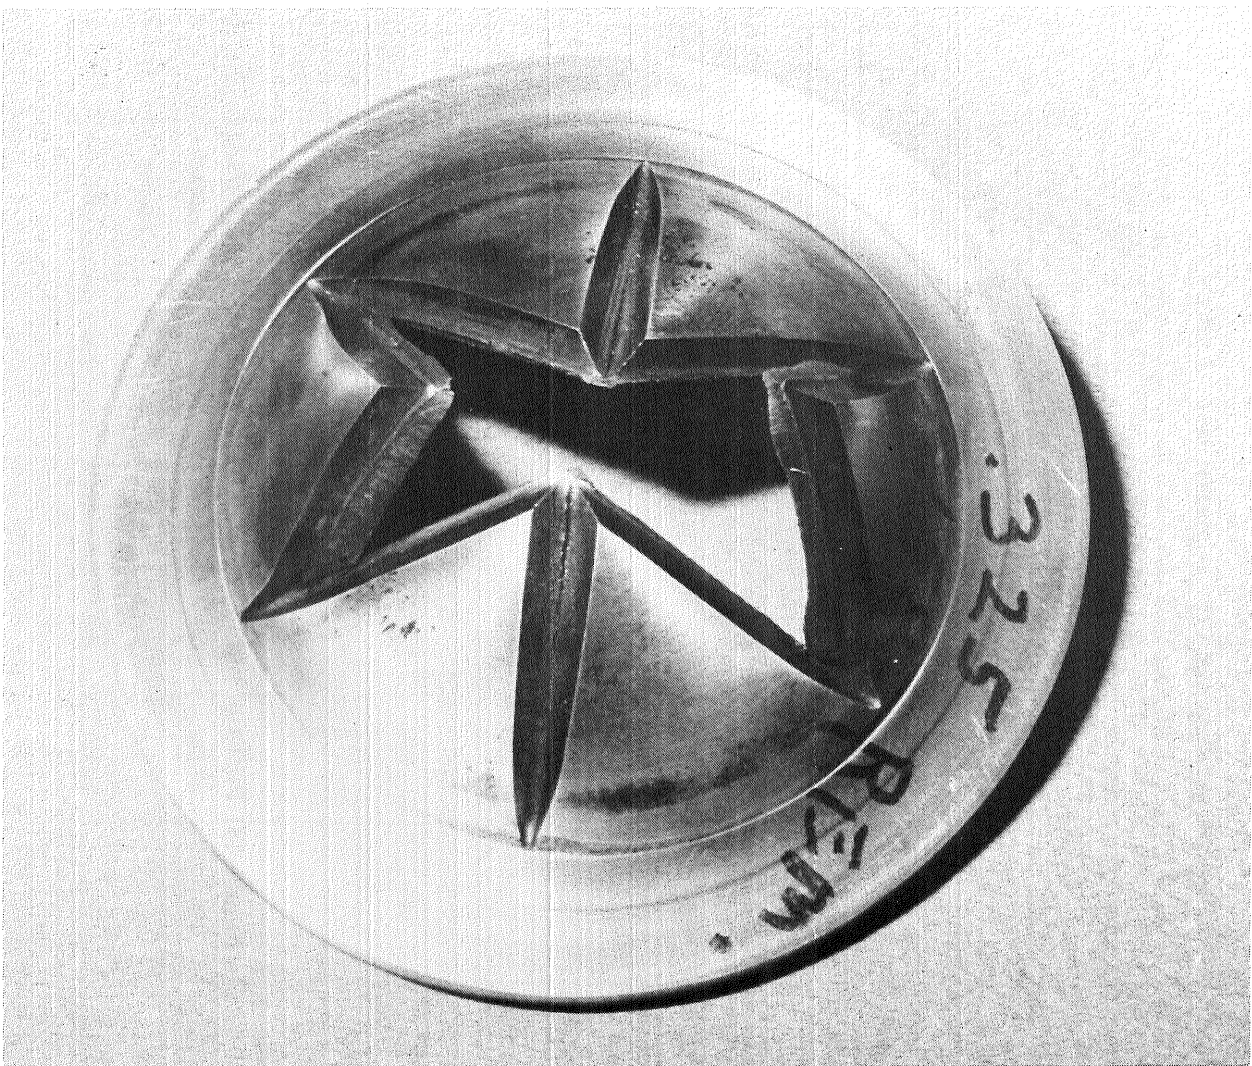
Post-run photo of first Impulse Facility run diaphragm.
